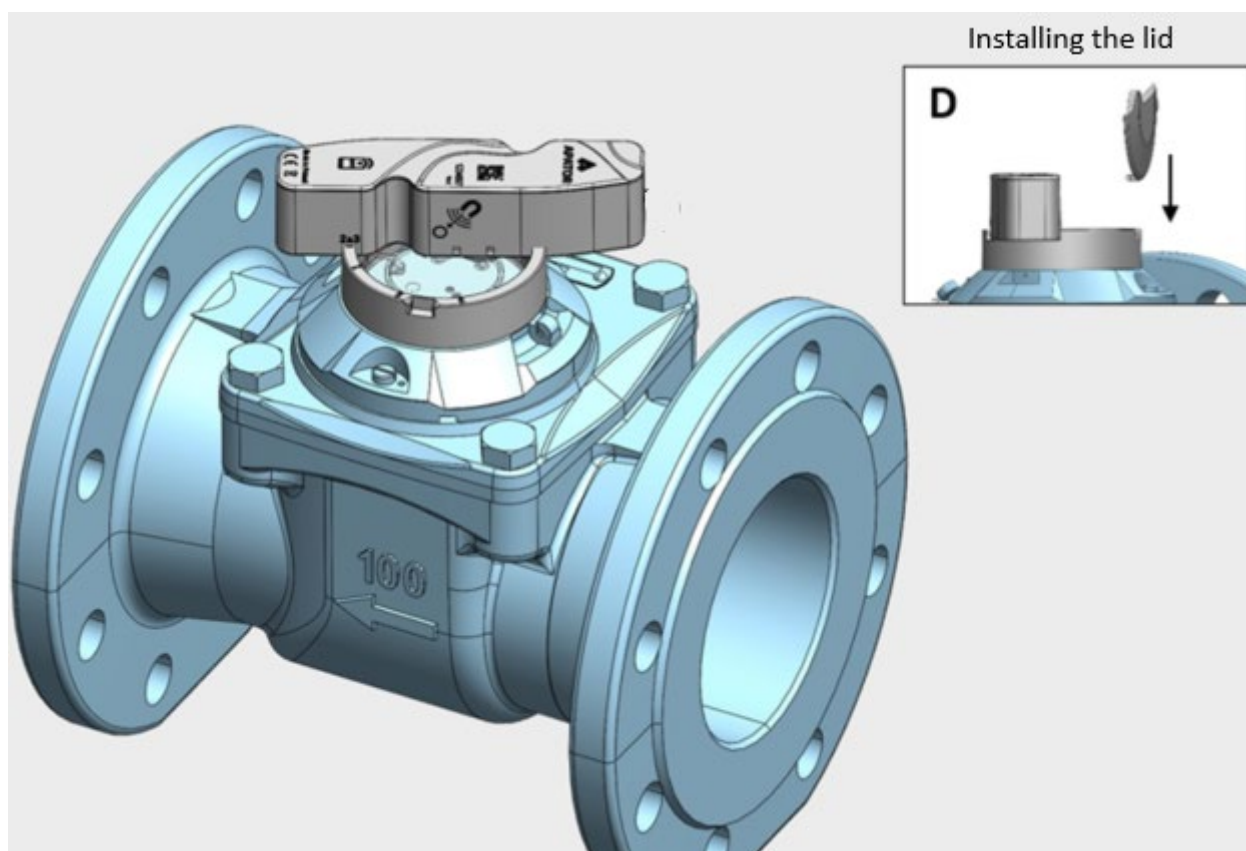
View of a universal radio adapter fitted to an industrial water meter.
